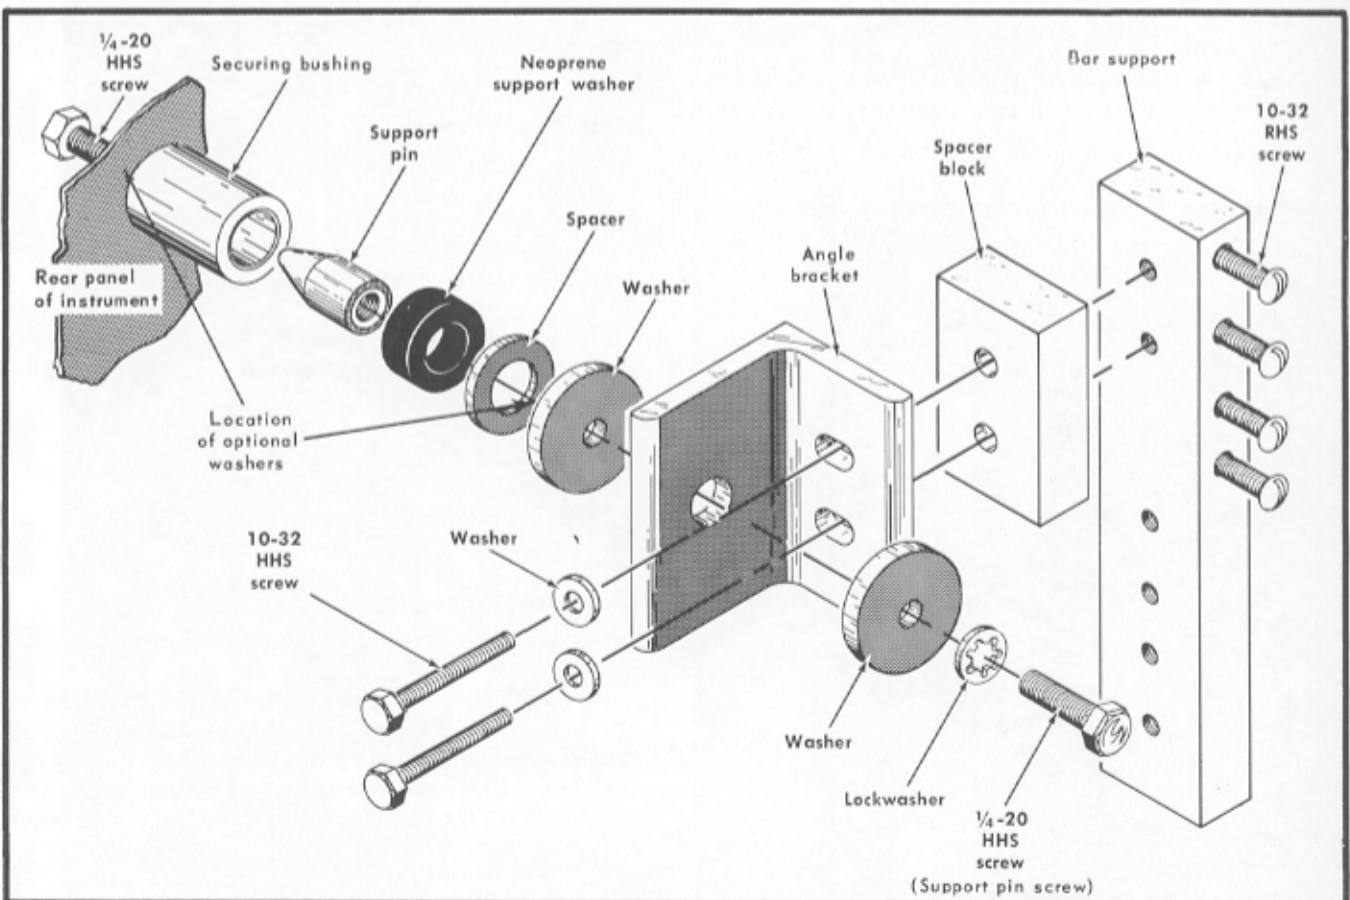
Rear-support ruggedizing hardware. Optional washers (purchased separately under Tektronix Part No. 210-0866-00) may be required for depth adjustment as described in the text.
